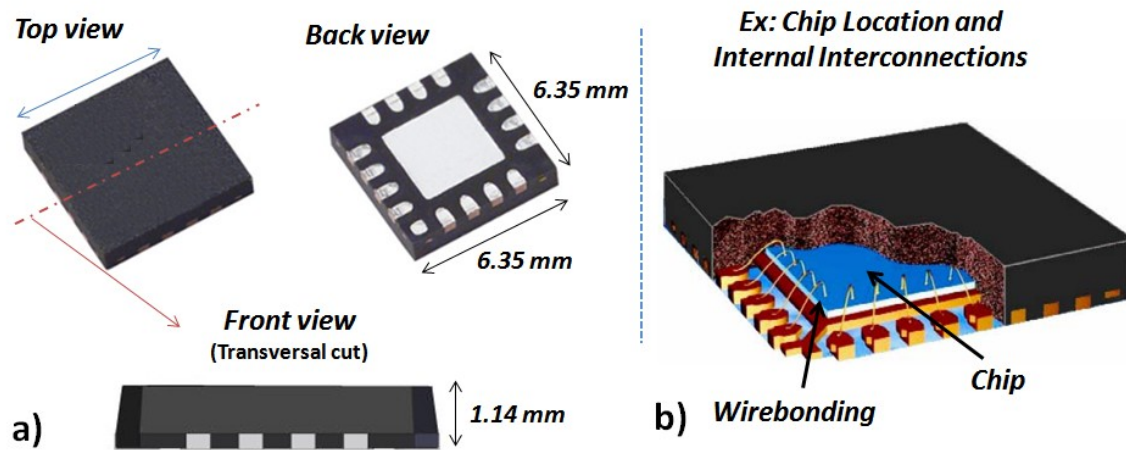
QFN example a) Kyocera 16 I/O package²⁴ and b) Internal view (chip and interconnections)²⁵
